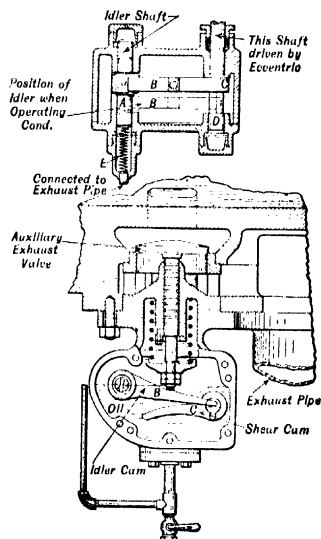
Automatic Device to operate Auxiliary Exhaust Valve of Skinner Unaflow Engine.
